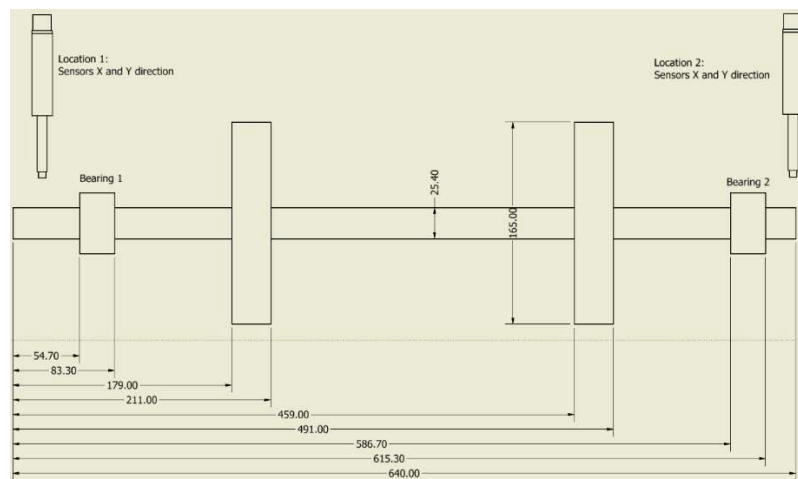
Rotor-Bearing System for Config. 2 (mm)
